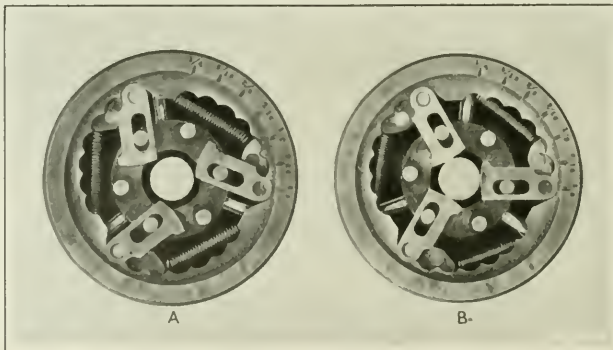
Views of Chuck with Cover removed, showing Jaws in Open and Closed Positions
